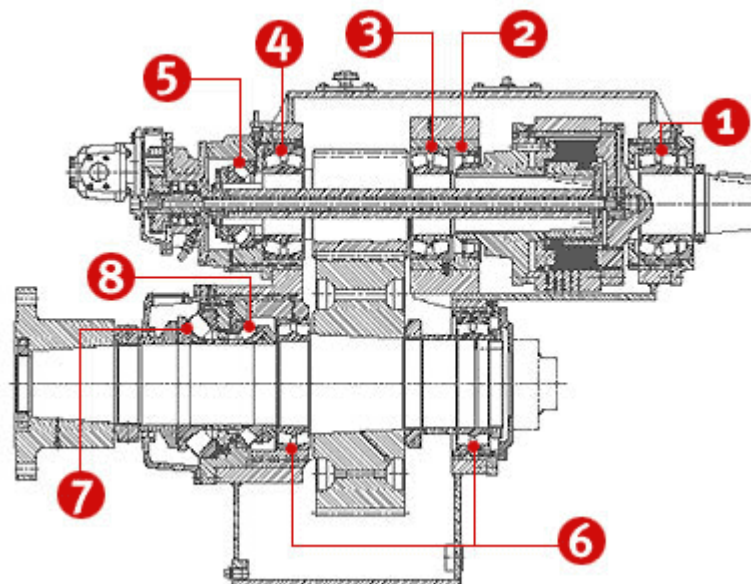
; Gear Box set up with propeller shaft: 1, locating bearing,2, floating bearing,3 and 4 two spherical roller bearings,5, spherical roller thrust bearing,6,two spherical roller bearings 7,a spherical roller thrust bearing,8,the smaller spherical roller thrust bearing .
